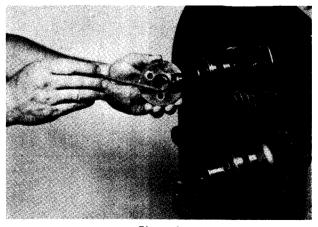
Figure I Install retainer plate, inner diameter chamfer toward bearing.
